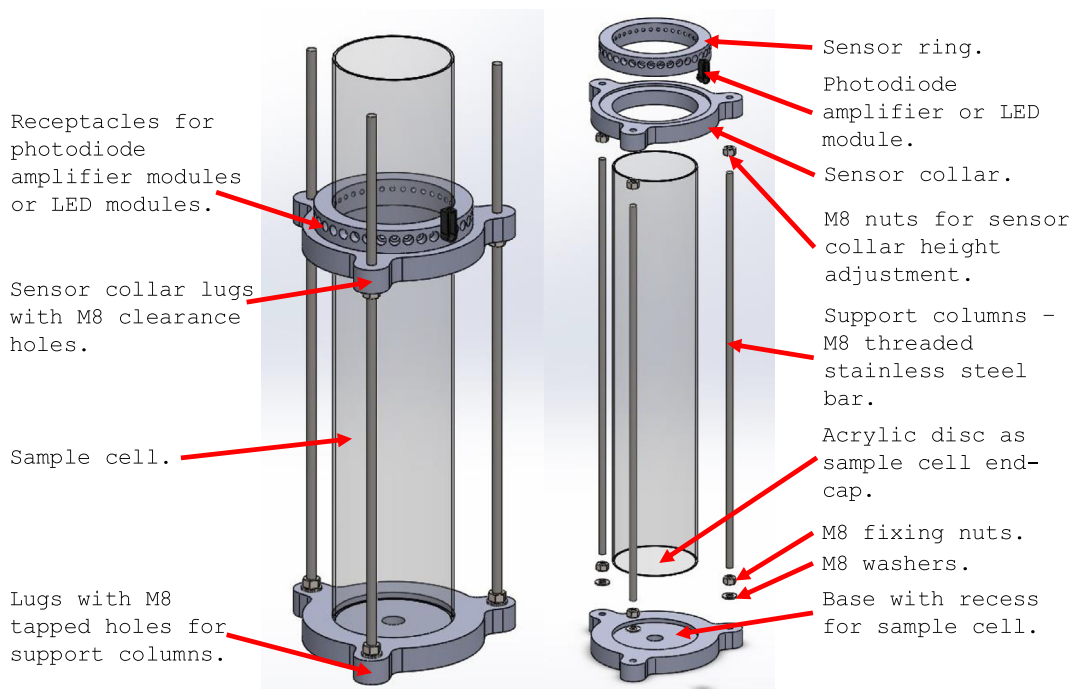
TARDIIS instrument assembly (left) and exploded view (right) showing the mounting system with support columns for the sensor collar containing the sensor ring.
